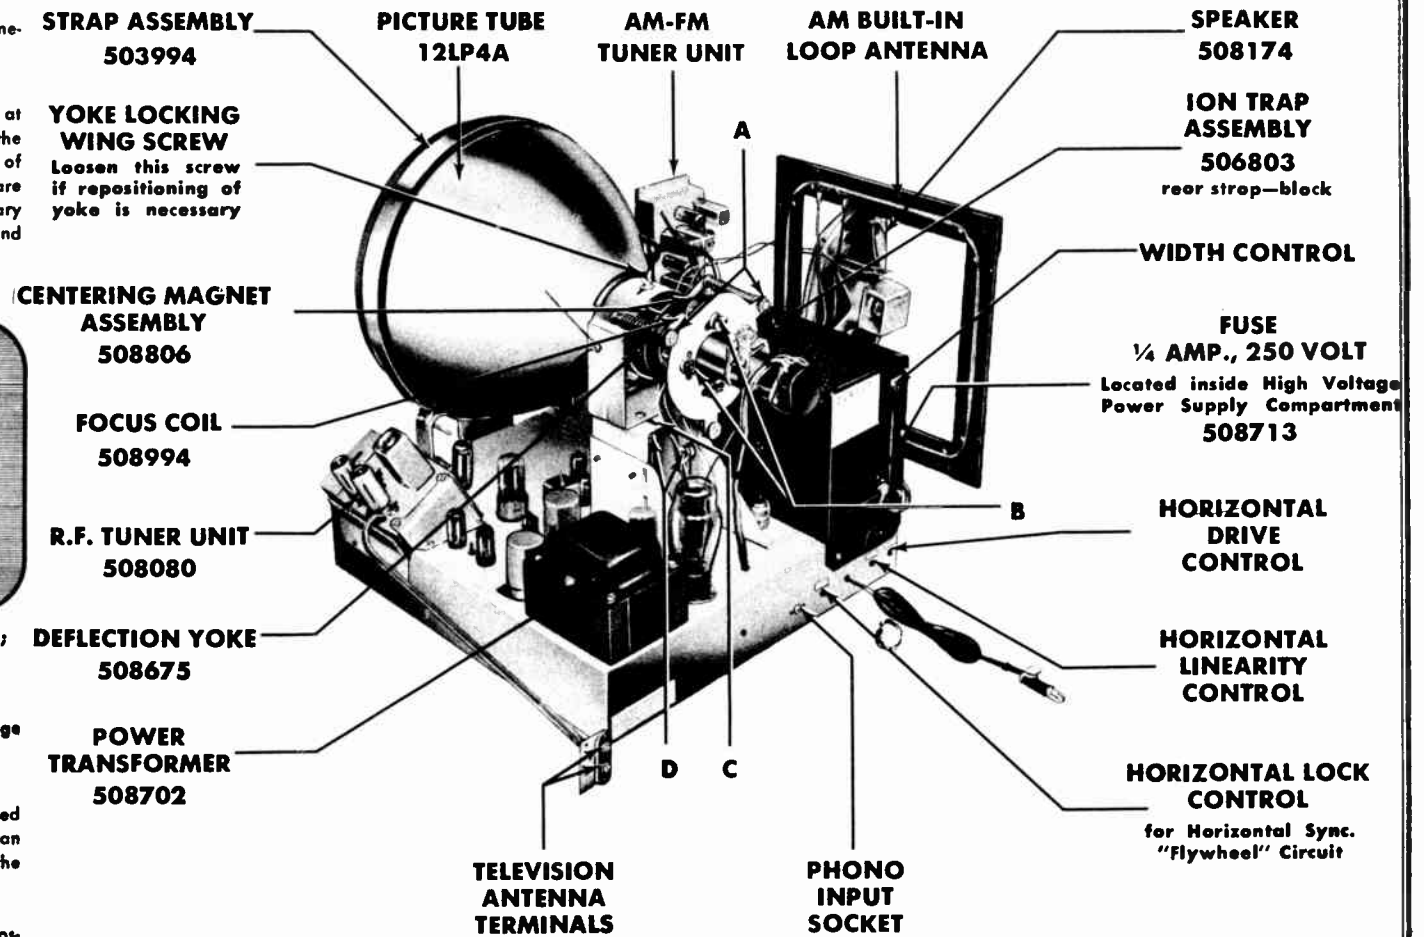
CHASSIS AND PICTURE TUBE ASSEMBLY
